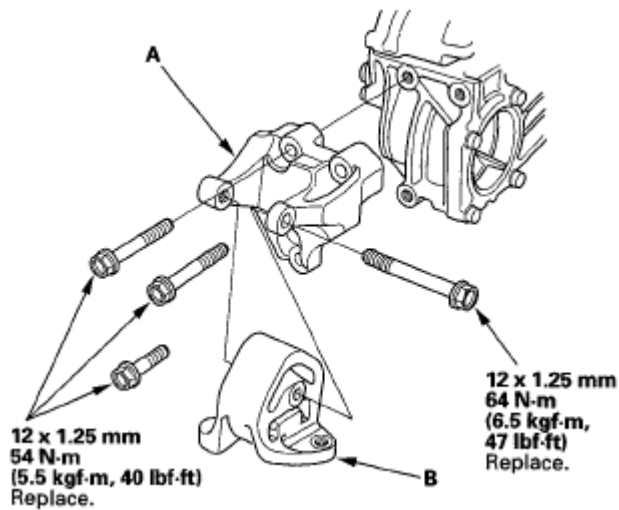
Identifying Rear Transmission Mount Bracket And Rear Transmission Mount (4WD) With Torque Specifications
